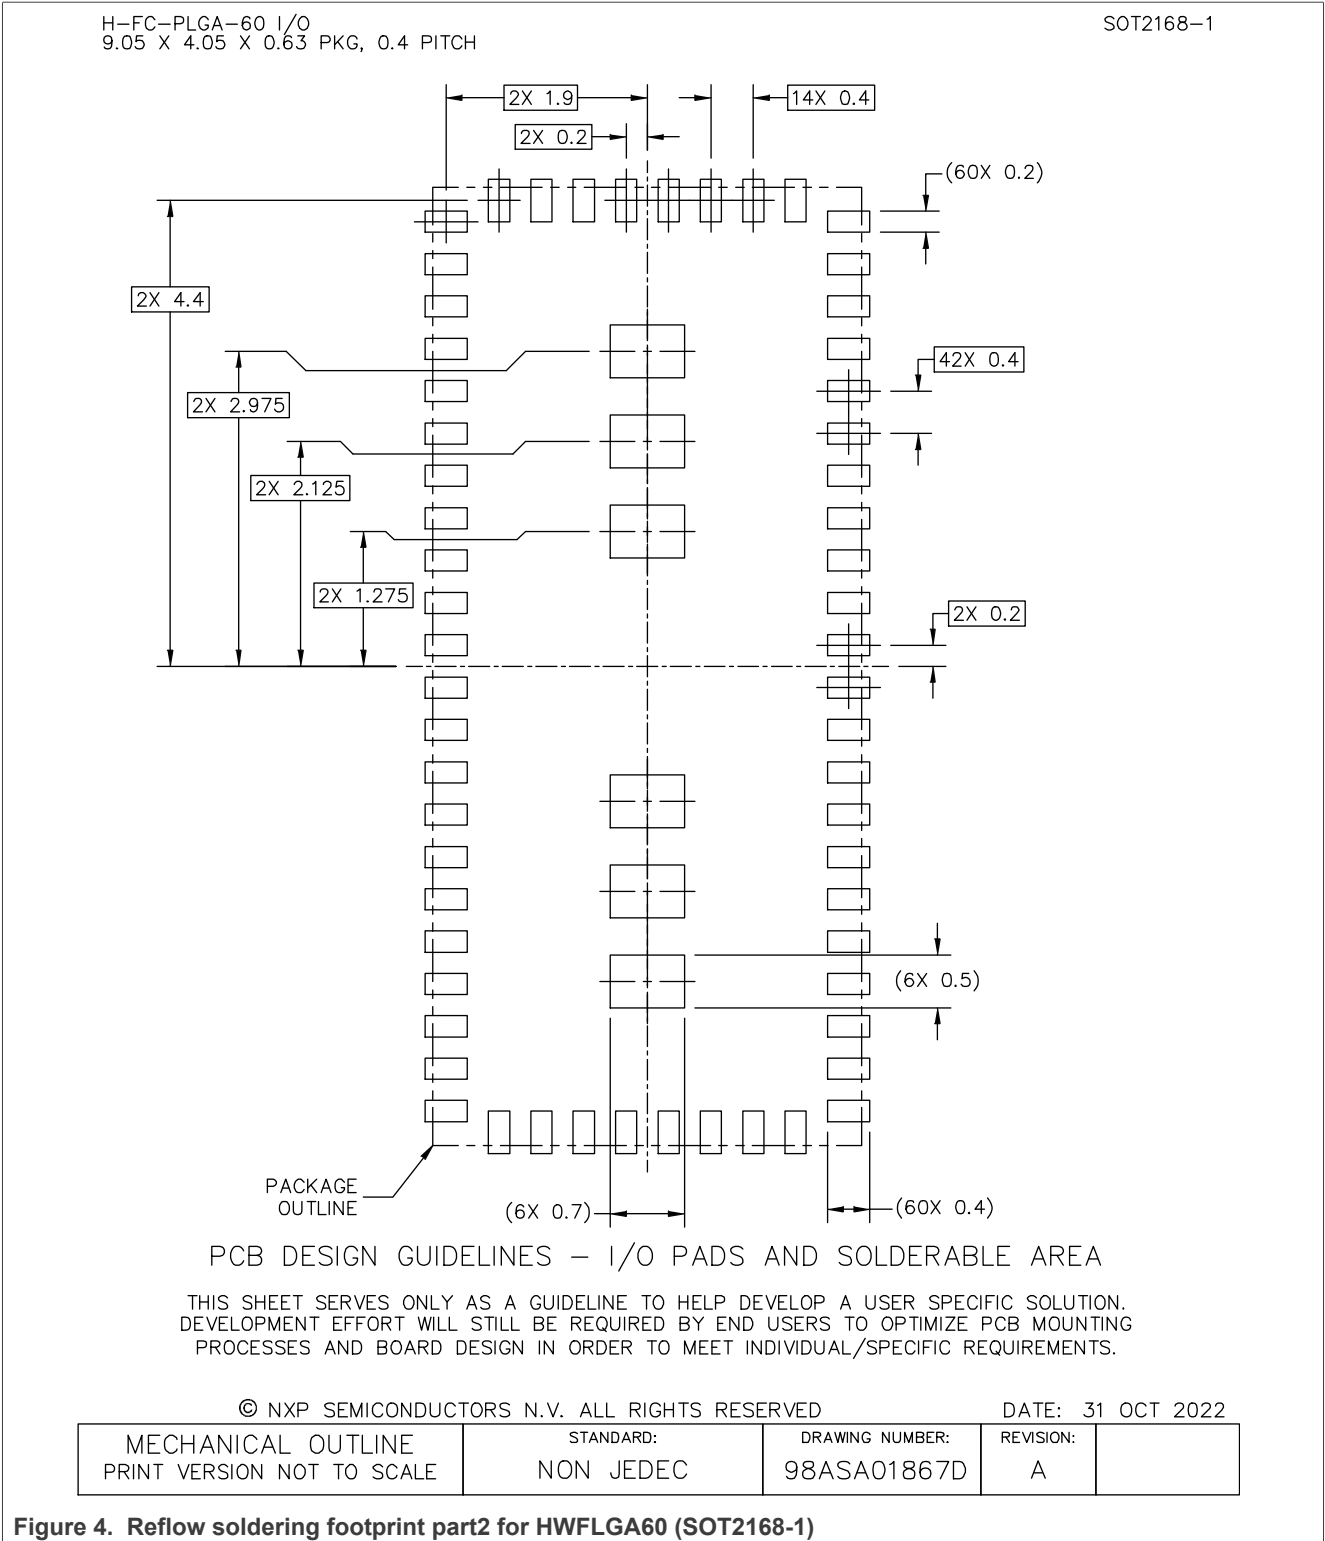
Reflow soldering footprint part2 for HWFLGA60 (SOT2168-1)
